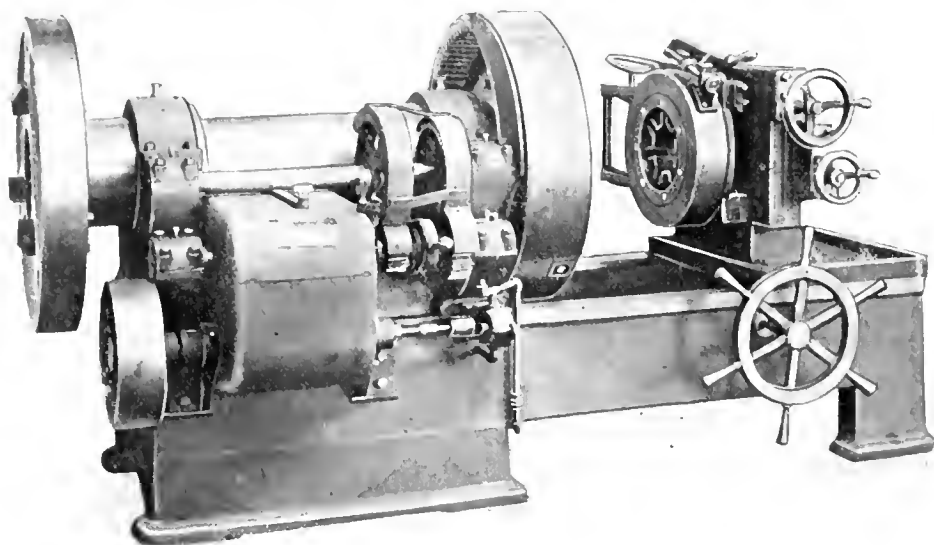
The Stoeber 1909 Model, Geared Drive, Pipe Threading and Cutting-off Machine
